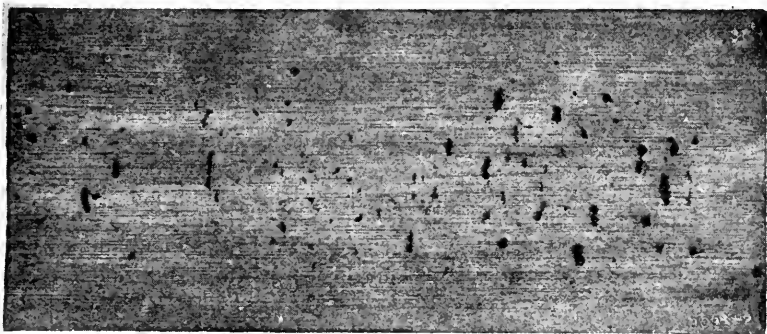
ETCHED HORIZONTAL SECTION AT END OF RAIL 9098-2.
